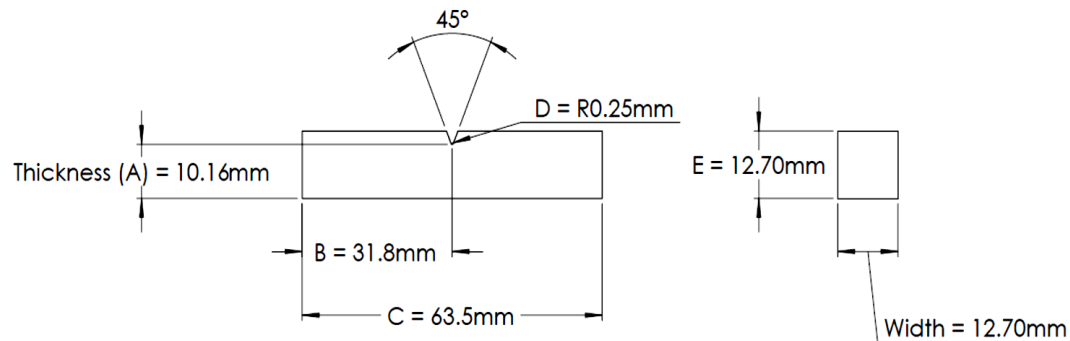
Test specimen dimensions as defined by ASTM D256-10.
